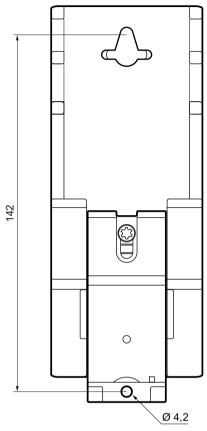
Drilling template with securing bar in the wall mounting position (as supplied)
